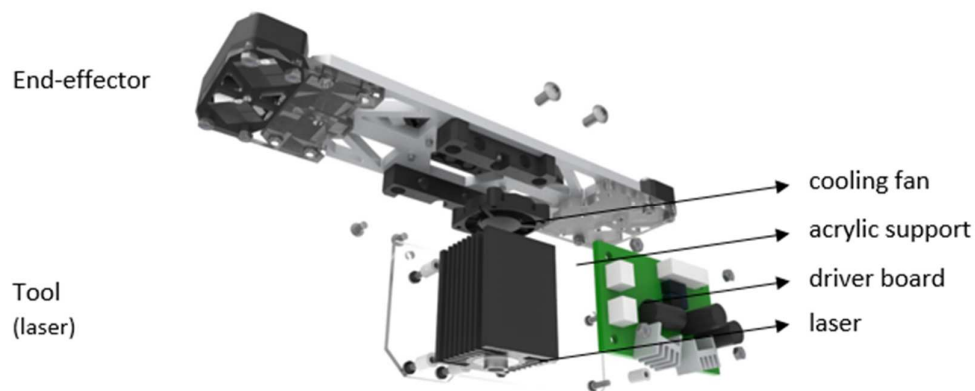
Exploded view of the SCALA manipulator end-effector with laser.
